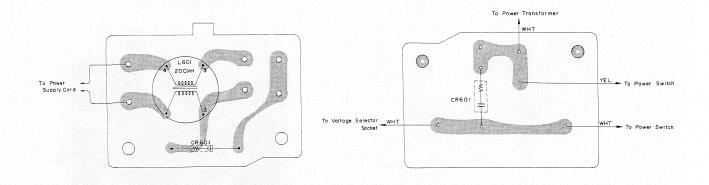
Bottom View of AC P.C. Board, PC-011 (USA/Canada)
